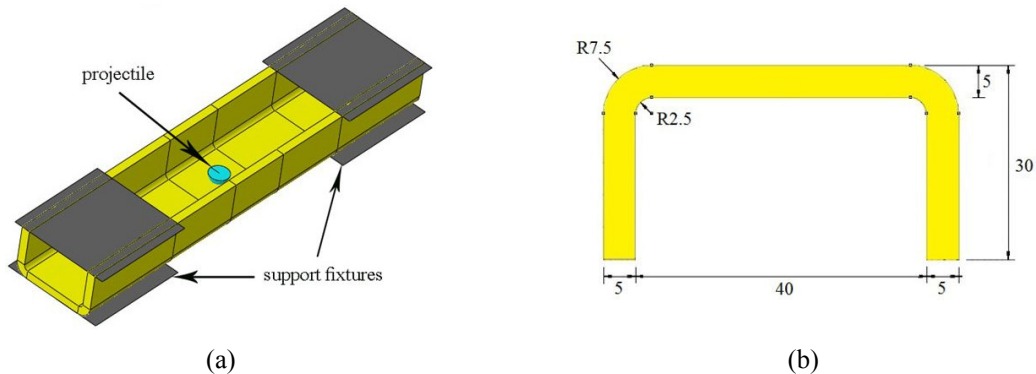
(a) Simulation of the test, including support fixtures and projectile; (b) Beam section dimensions in mm
